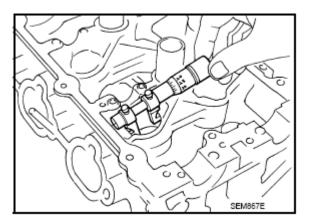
Measuring Inner Diameter Of Valve Lifter Hole Of Cylinder Head Using Inside Micrometer
